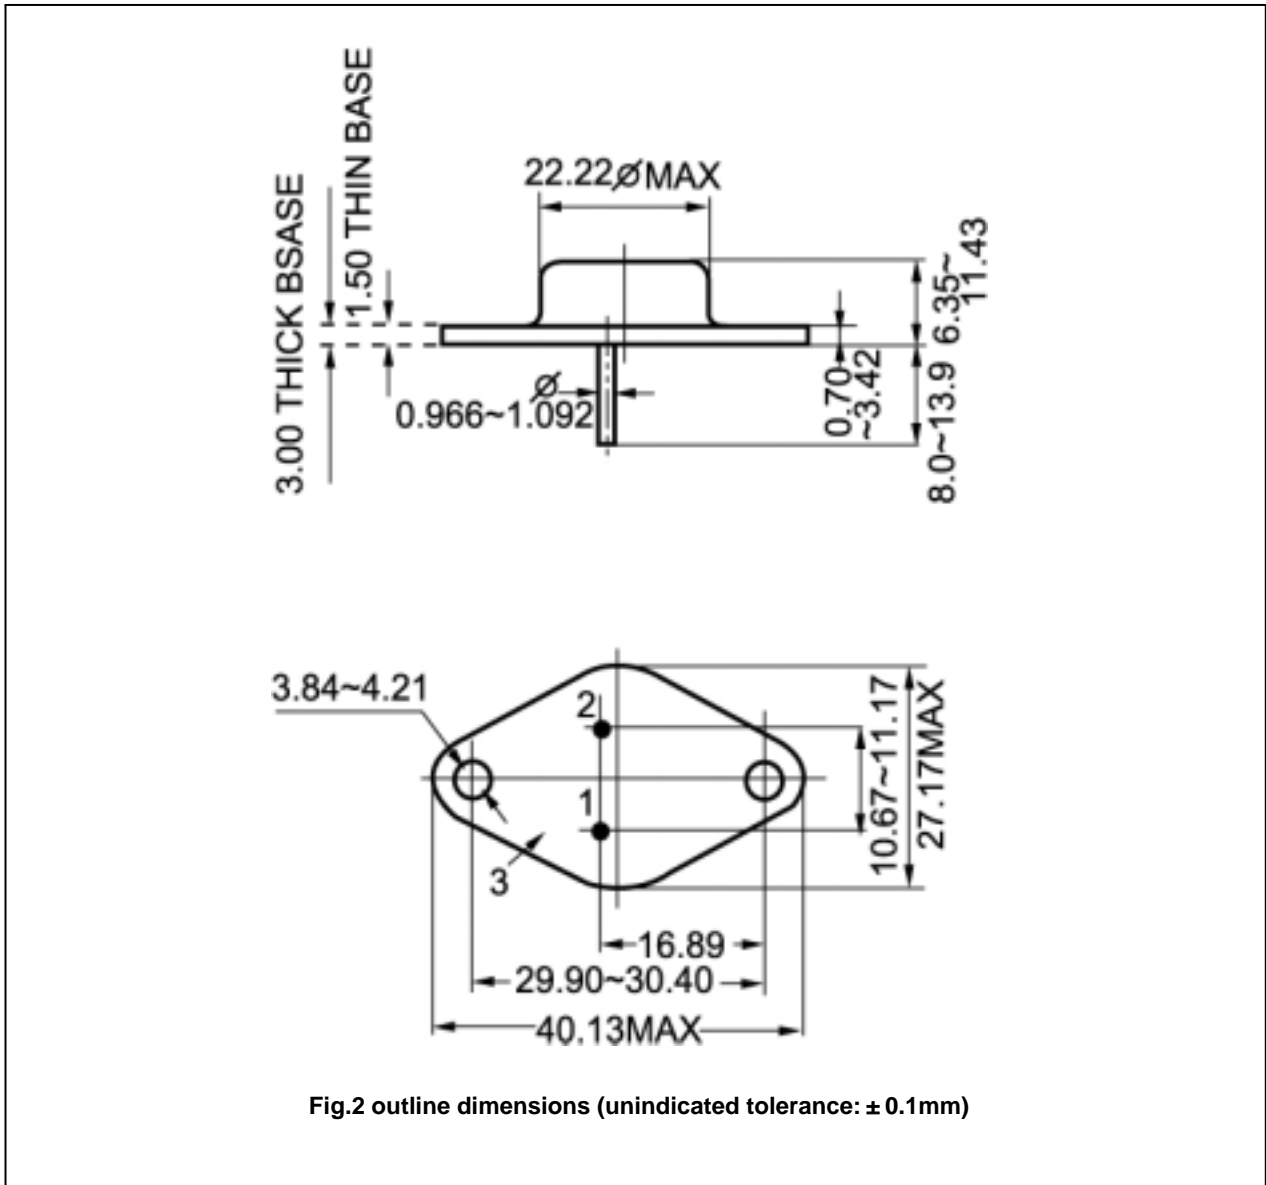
outline dimensions (unindicated tolerance: $\pm 0.1\text{mm}$)
